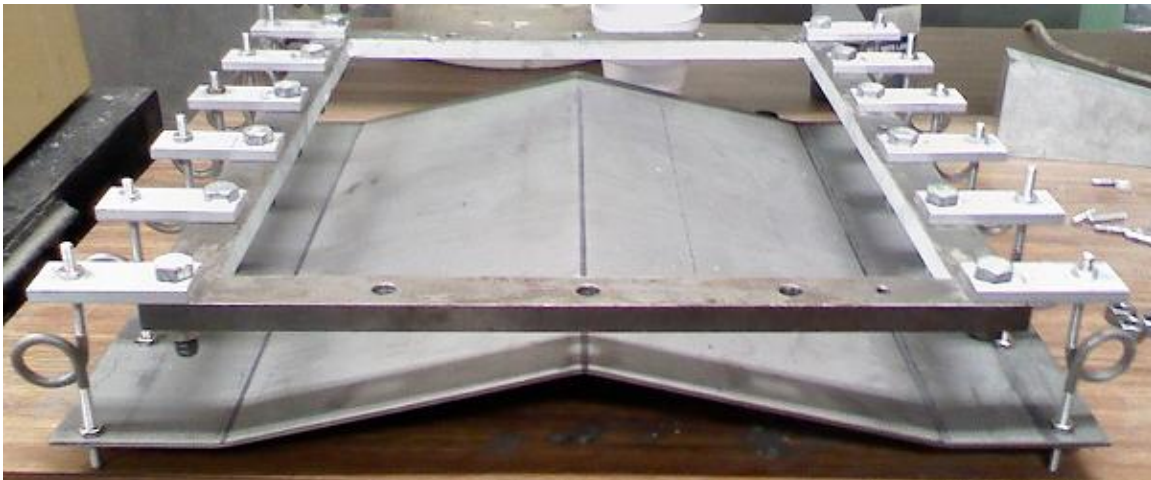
3/16" Single Coil Spring Pocket Plate
